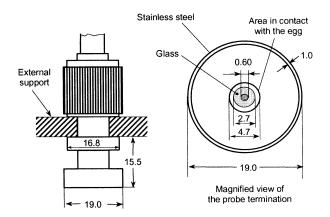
Schematic diagram of open-ended coaxial probe (all dimensions in mm).
